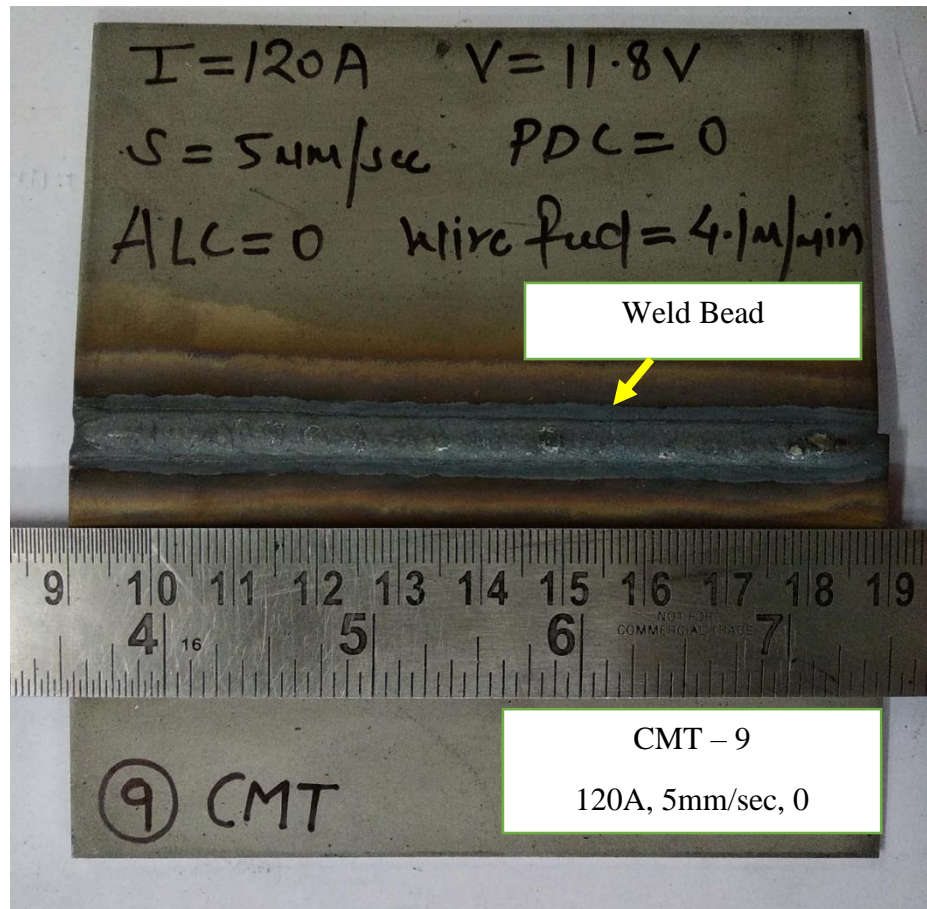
Image of CMT welded SS202 Sample 9 of thickness 1.58 mm
